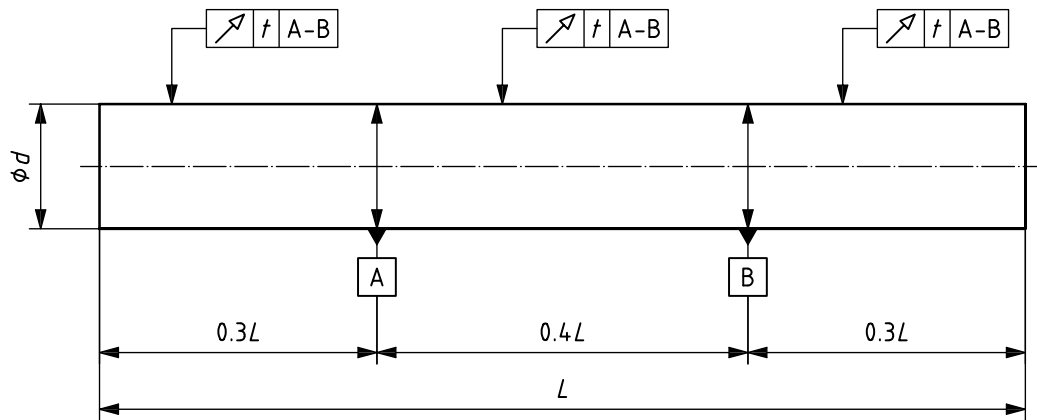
Solid and tubular shafts for series 5 sleeve type linear ball bearings
